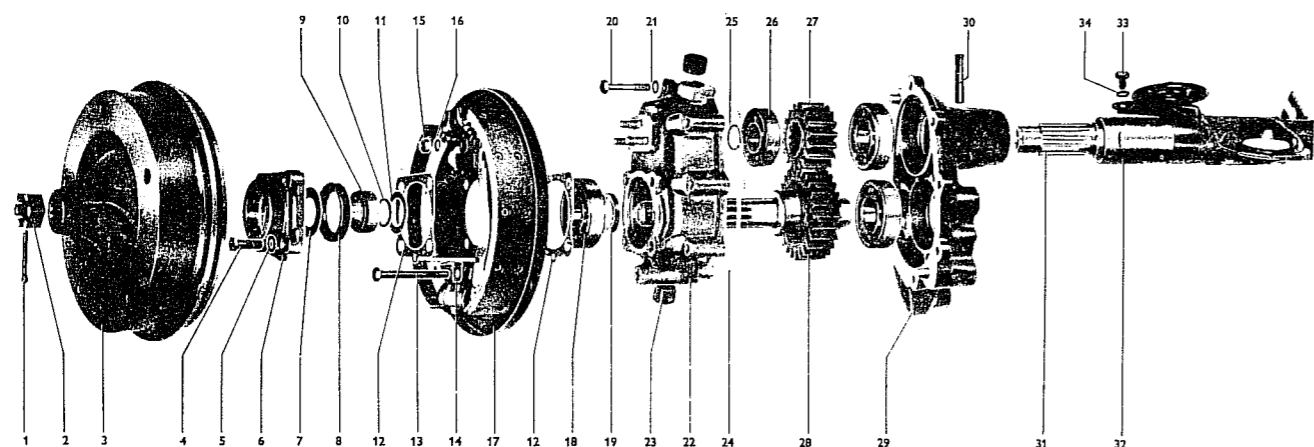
Exploded view of the reduction gearbox - 181 models.
